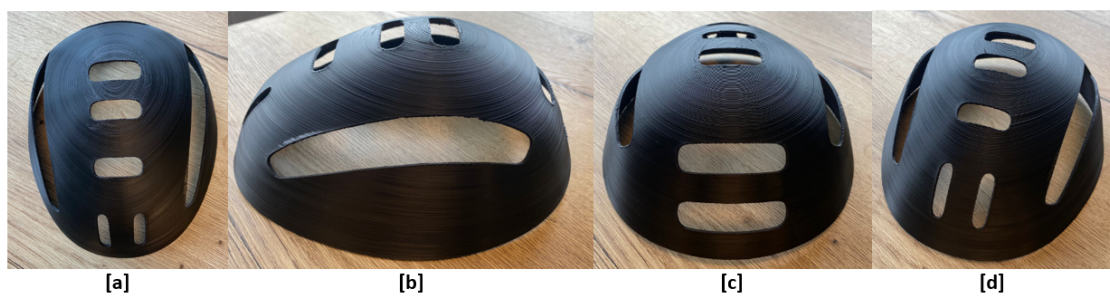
The 3D printed outer shell from PLA, the top view [a], the side view [b], the back view [c] and the isometric view [d].
